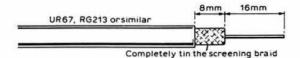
G3ERR's suggested method of cable preparation for soldering PL259 plugs
